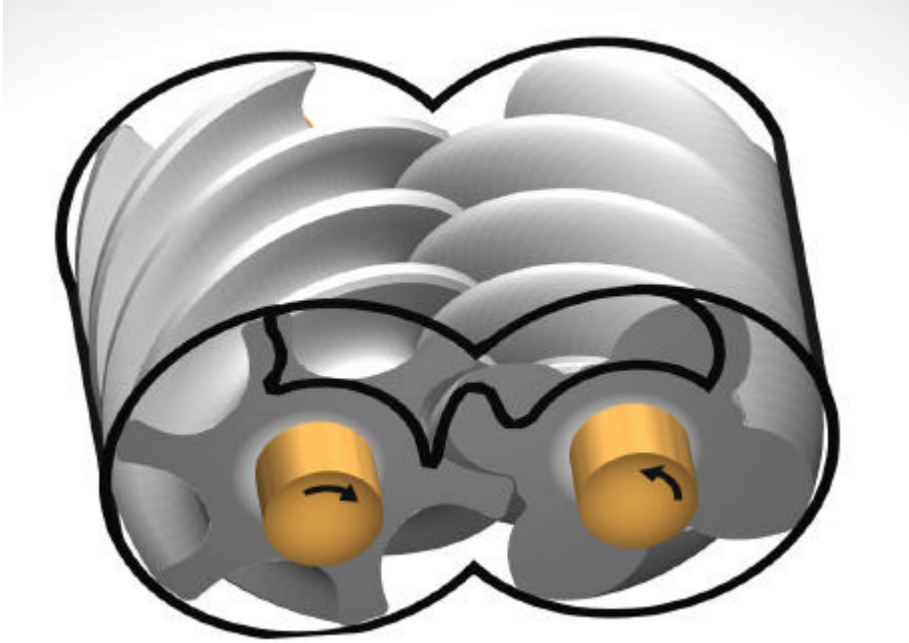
Twin Screw Compressor Rotors and Casing Outline
